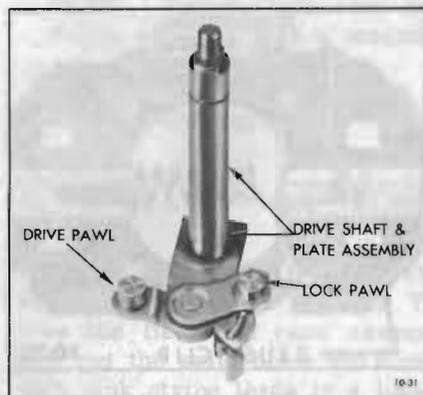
Assembling Lock Pawl Over Drive Pawl
